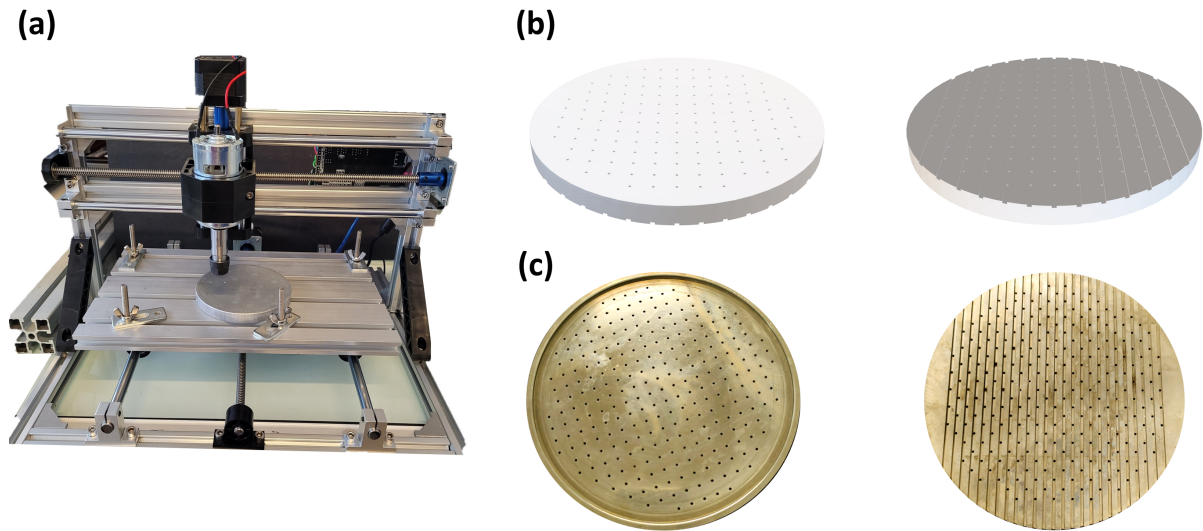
CNC machined aluminum substrates. (a) Programmable homemade CNC machine used to perforate the substrates. (b) Top and bottom views of a 3D model and (c) a final piece. Several substrates having different hole densities were machined. In the bottom part, we engraved evacuation channels that are in contact with the atmospheric pressure.
